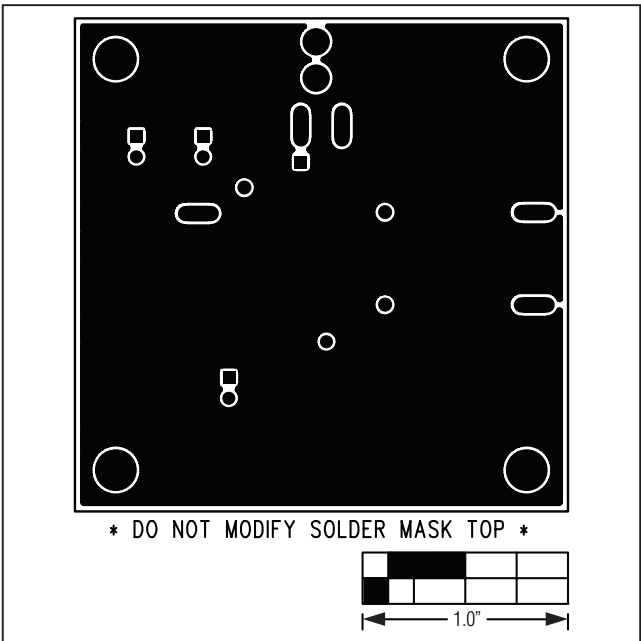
MAX98500 EV Kit PCB Layout—Solder Side
